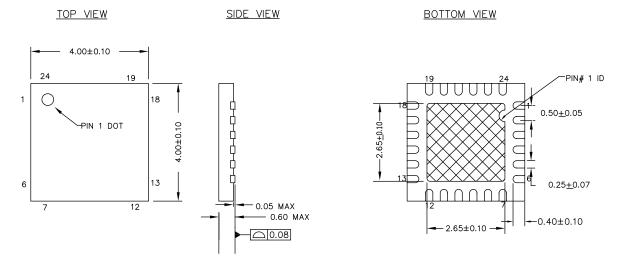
24-pin QFN EPAD (Sawn) Package Outline
